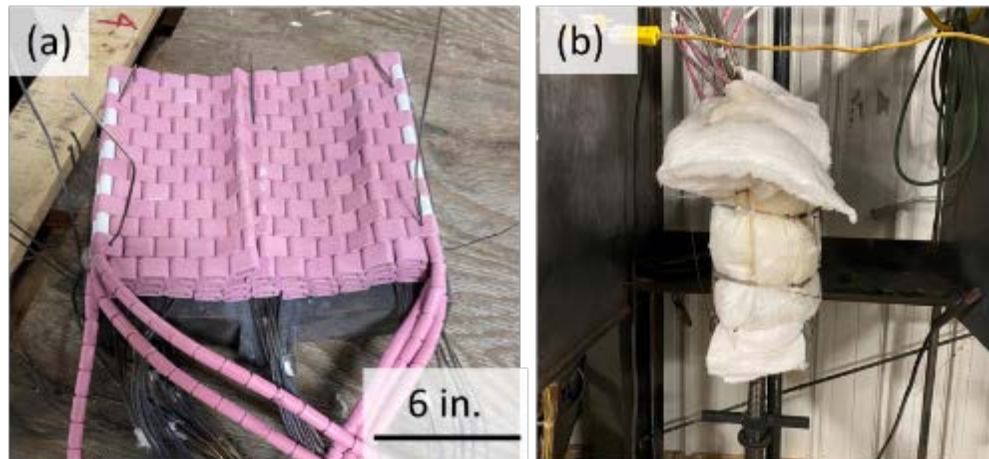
(a) Top view of 12" x 12" x 2" thick 347H-E347 SS weld with three heaters stacked on the top face of weld, (b) vertical setup for PWHT with surrounding insulation and clamped on the bottom side of plate
